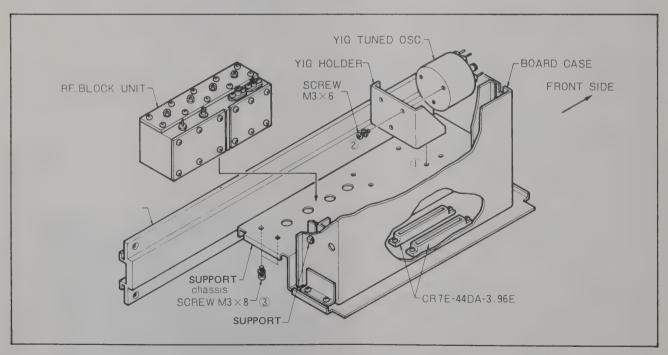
YIG & RF. BLOCK Assembly Diagram
